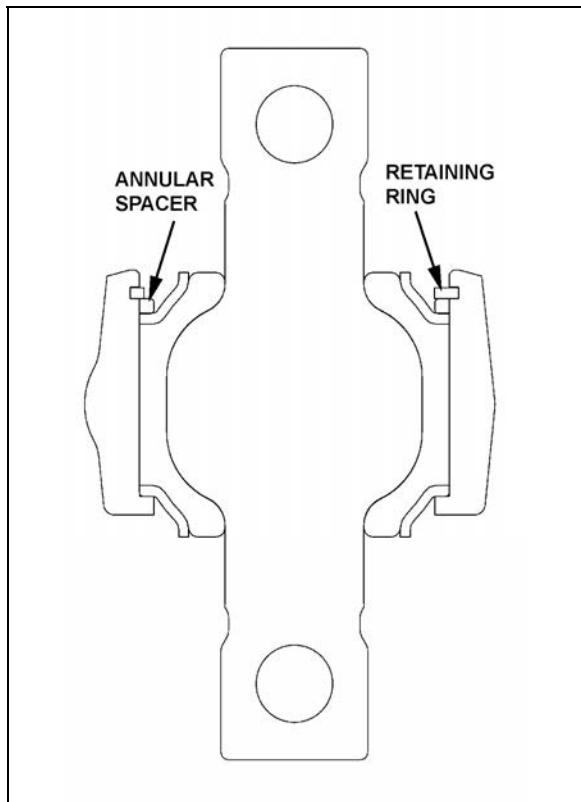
LOWER A-ARM BALL JOINTS 16114
